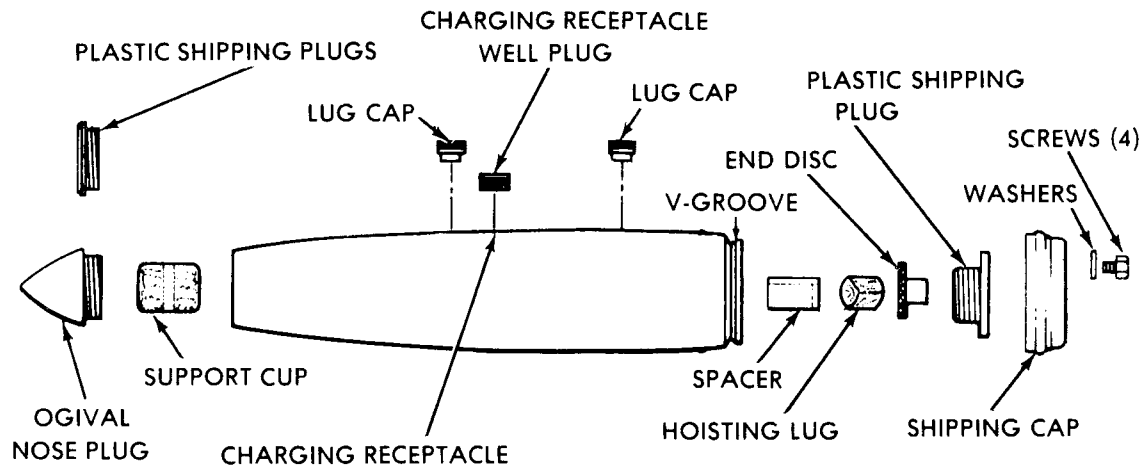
LDGP Bomb MK 80 Series — Exploded View (Shipping Configuration)
